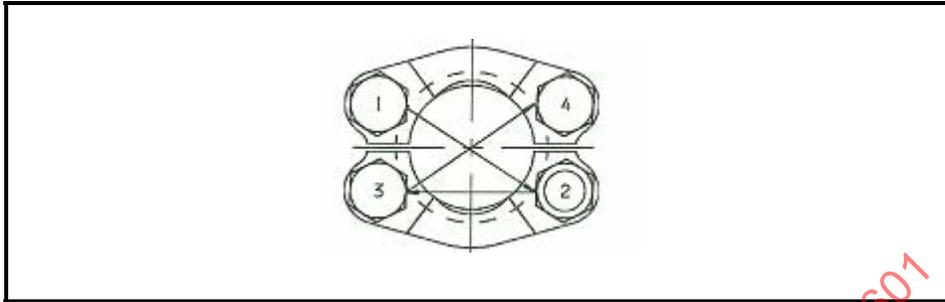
ISO 6162 PART 1, ISO 6162 PART 2 AND SAE J518
